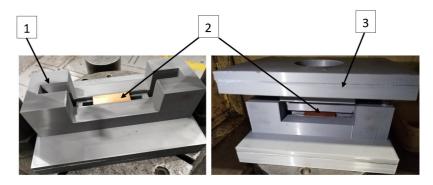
PLA die tooling on a hydraulic drawing press 1 -matrix, 2 - blank, 3 - punch
